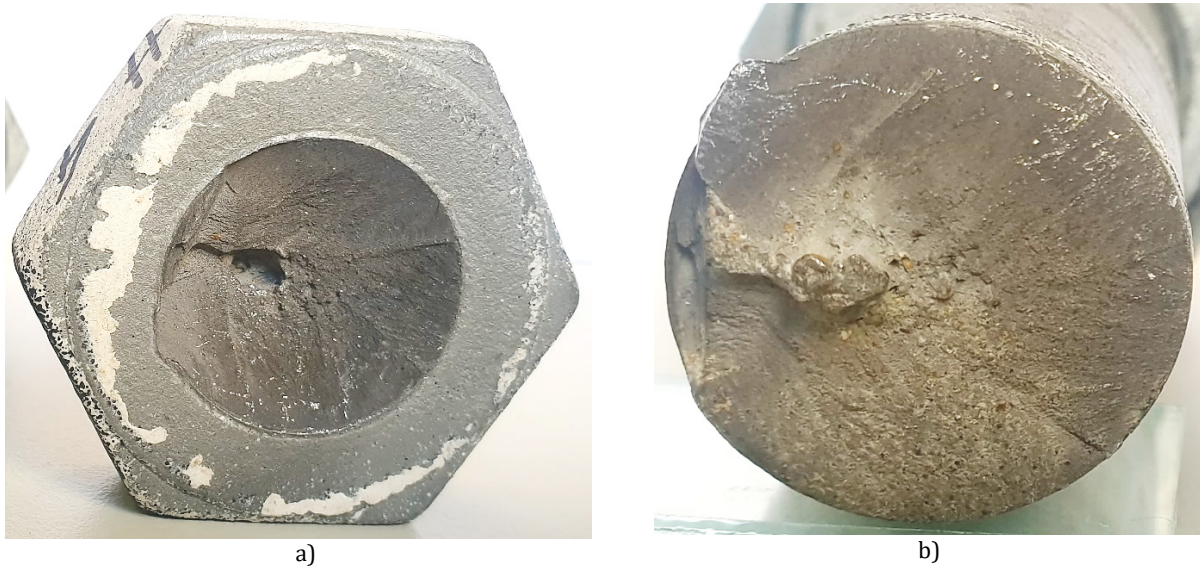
Fracture surfaces on the received bolt: (a) head; (b) shank
